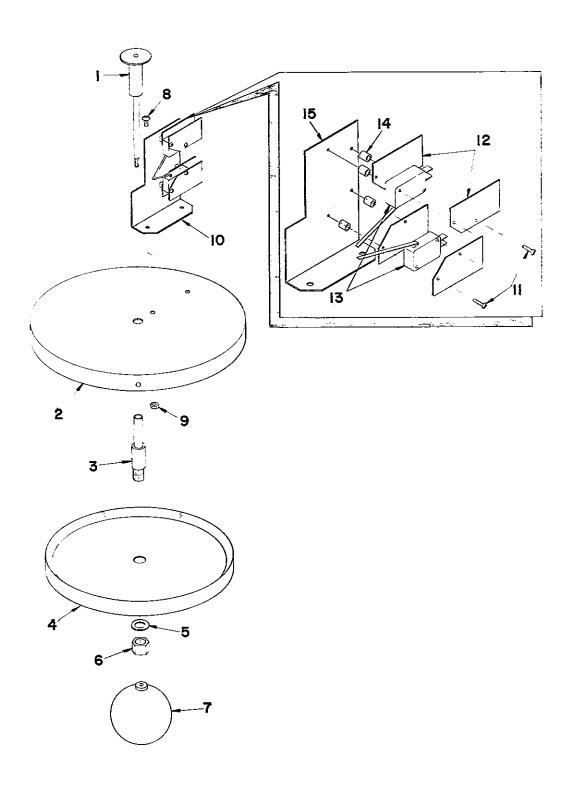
TANK AND JACKET TOP ASSEMBLY
